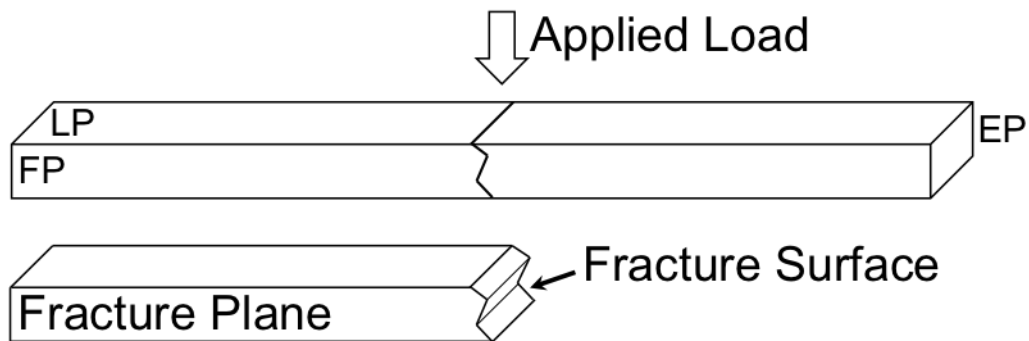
Illustration of post 3-point bend test sample, showing the orientation of extrusion reference planes to the fracture plane and fracture surface.
